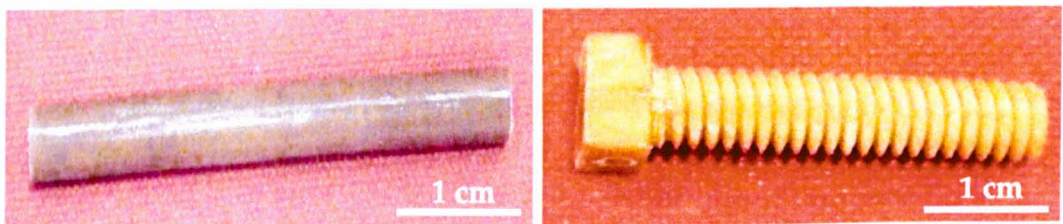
Photographs of the rod and screw prepared via forging process.
